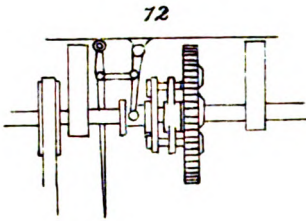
, toothed wheel being loose on shaft, is engaged by moving lower end of hand lever to the right, which throws the clutch pins into wheel, the opposite motion withdrawing clutch, and so suspending the motion of machinery in connection with such wheel.
